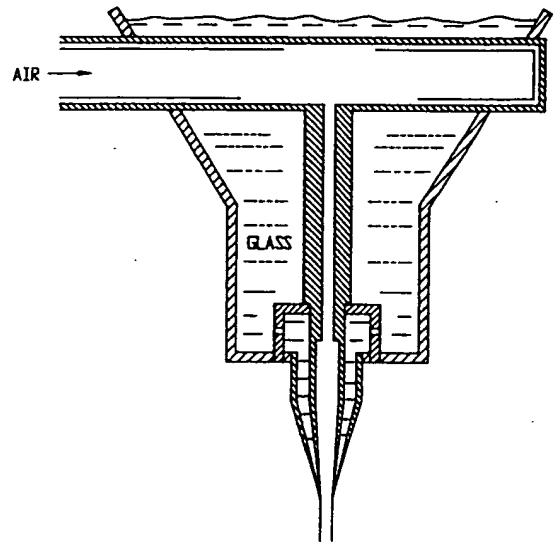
A much-enlarged view of a bushing nozzle designed for the manufacture of hollow g fibres.
